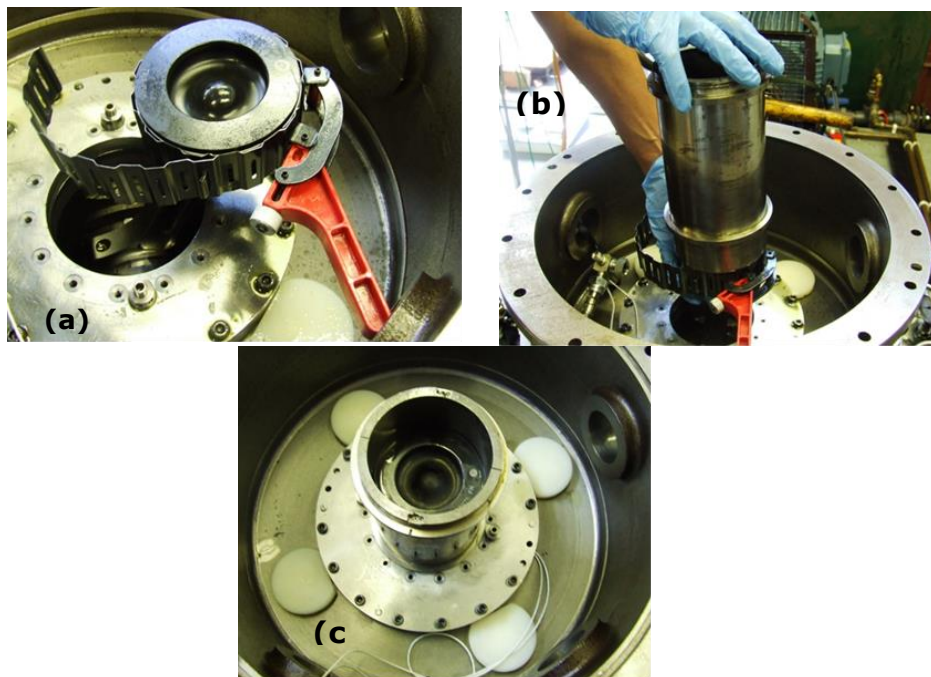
a) Piston clamped with ring compressor, b) piston inserted into liner, and c) Liner seating on the bottom diaphragm
